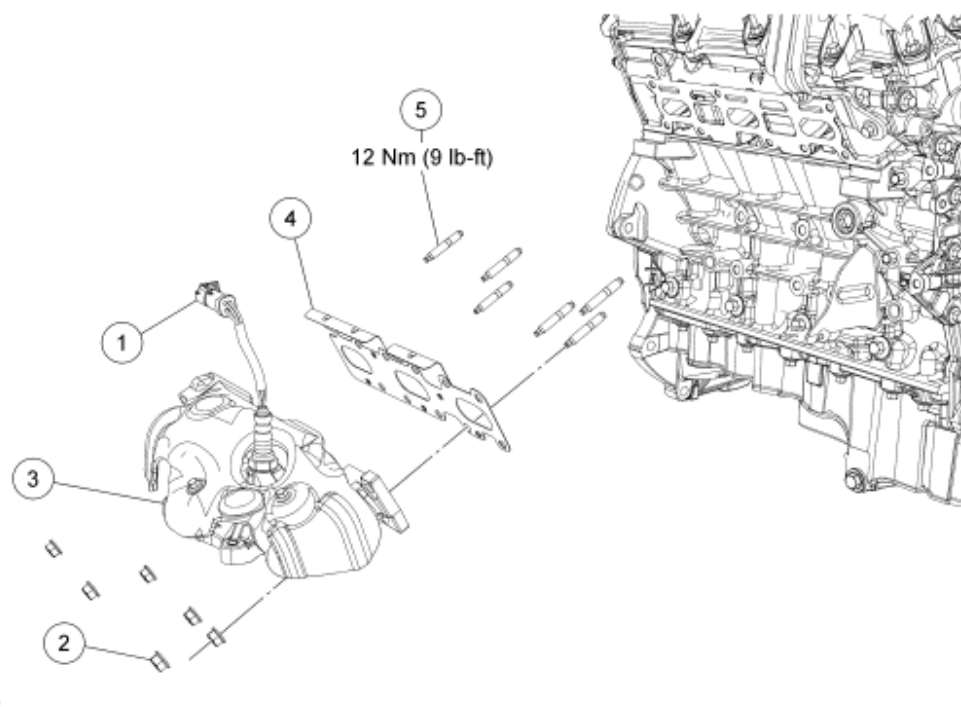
Exploded View Of Exhaust Manifold - RH With Torque Specification
